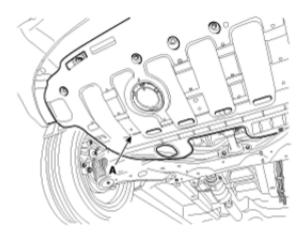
Identifying Under Cover Courtesy of HYUNDAI MOTOR CO.
